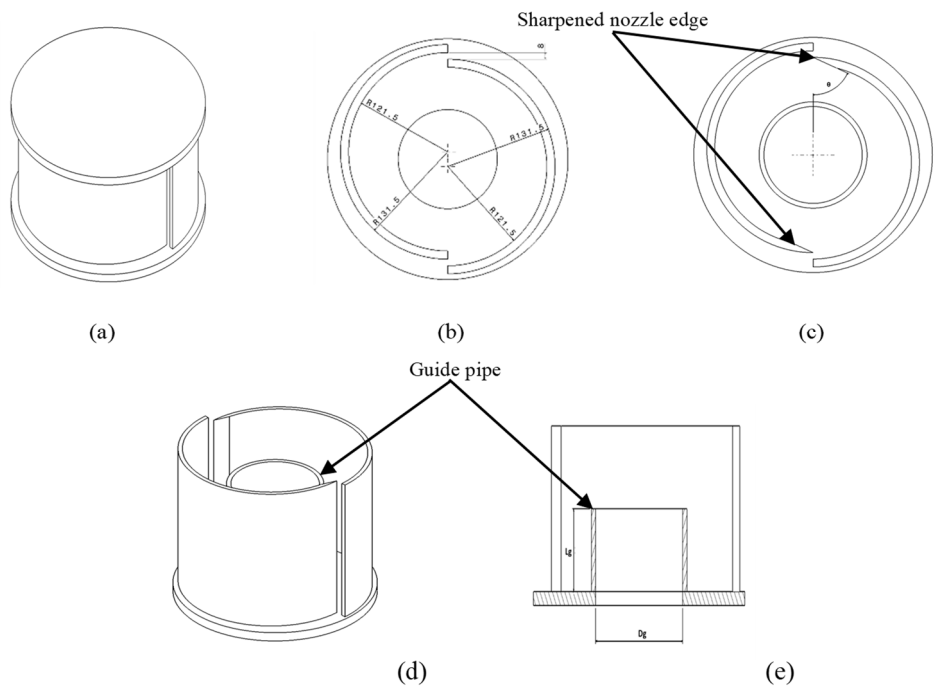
Baseline design (a) isometric view, (b) top view open at the top and Modified SRWT geometry open at the top (c) top view, (d) isometric view and (e) section view.
